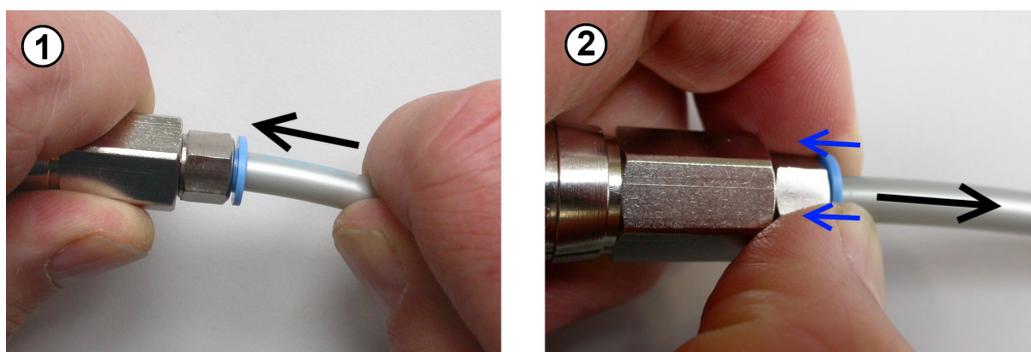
Assembly and disassembly of the air pressure connector (left in both pictures) and a 6 mm tube (right in both pictures)
